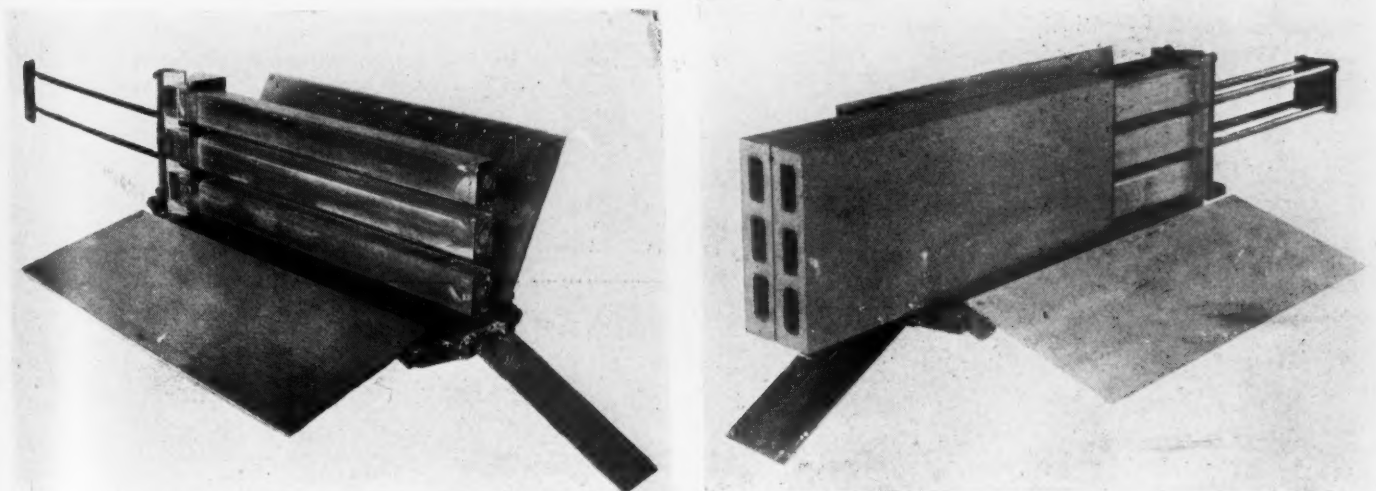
Details of the single molding unit (left) and double molding unit (right) used in the tile machine shown in Figs. 9 and 11 respectively. Cores and side plates are of aluminum and the front plate of brass
